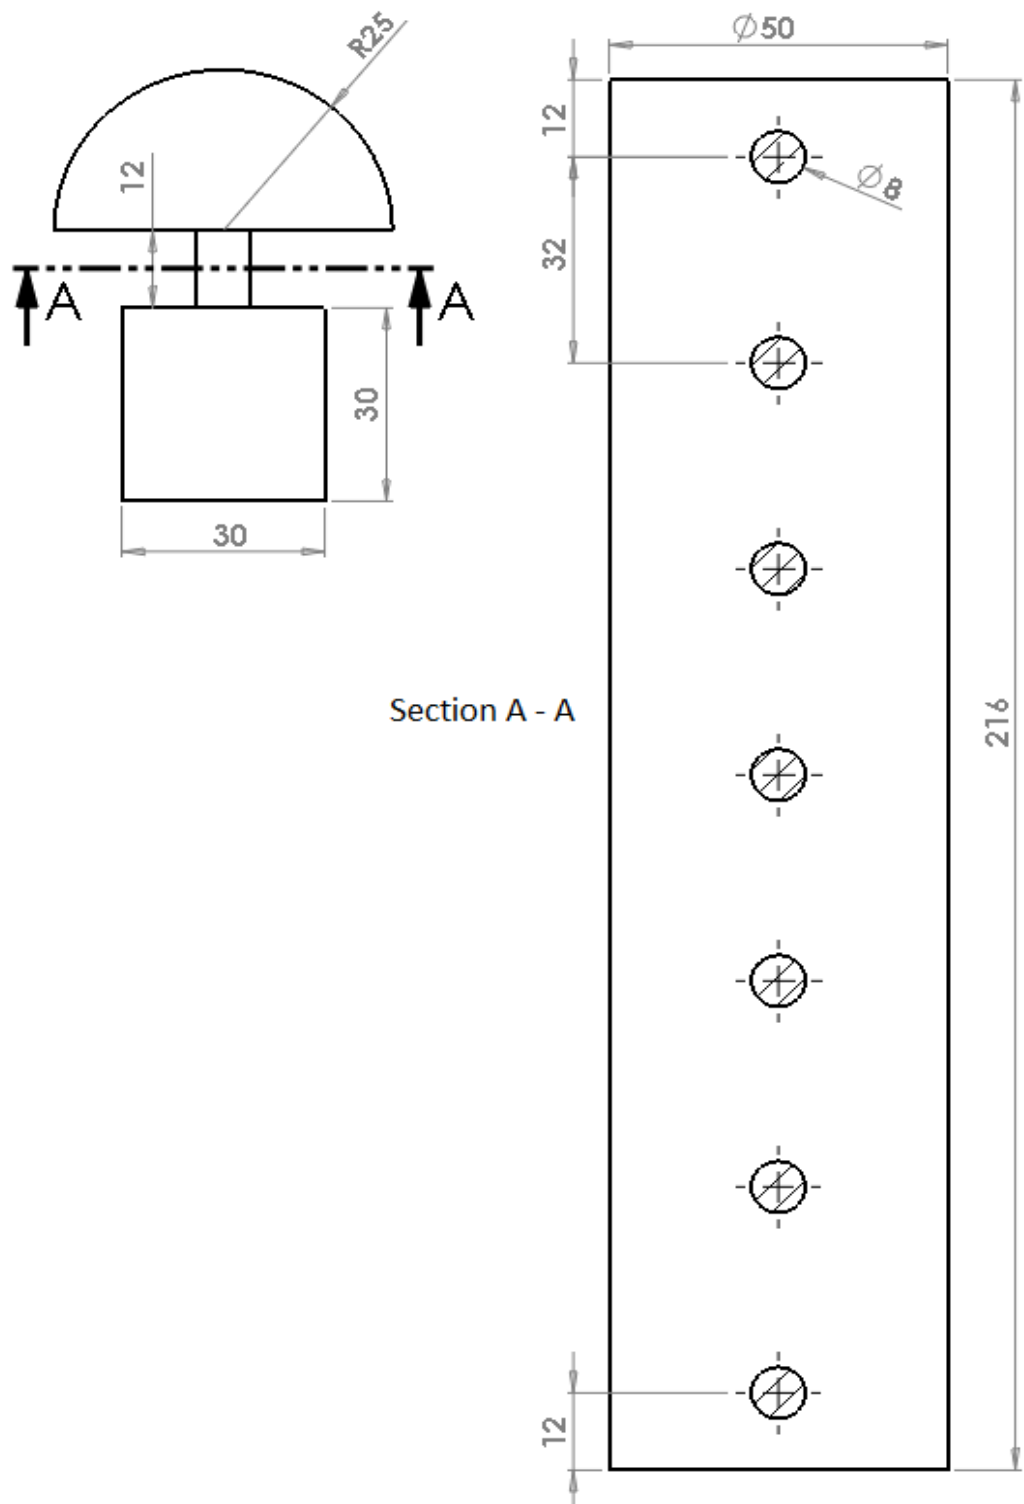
Geometry and dimensions of the leading edge (Dimensions are in mm)
